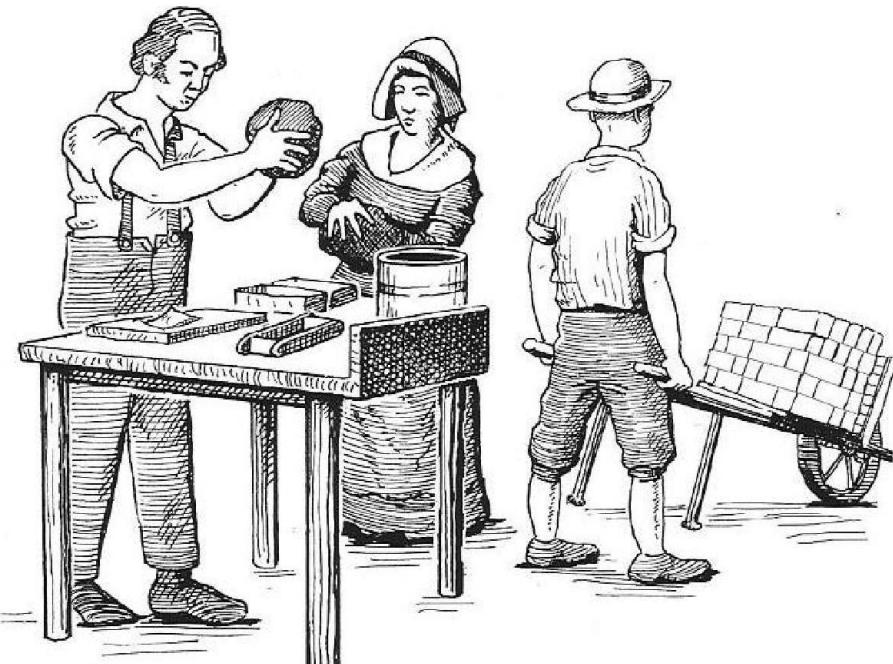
A family at work moulding sandstock bricks at a timber bench and delivering them on a barrow to the hack for drying. (Source: Ringer p14)
